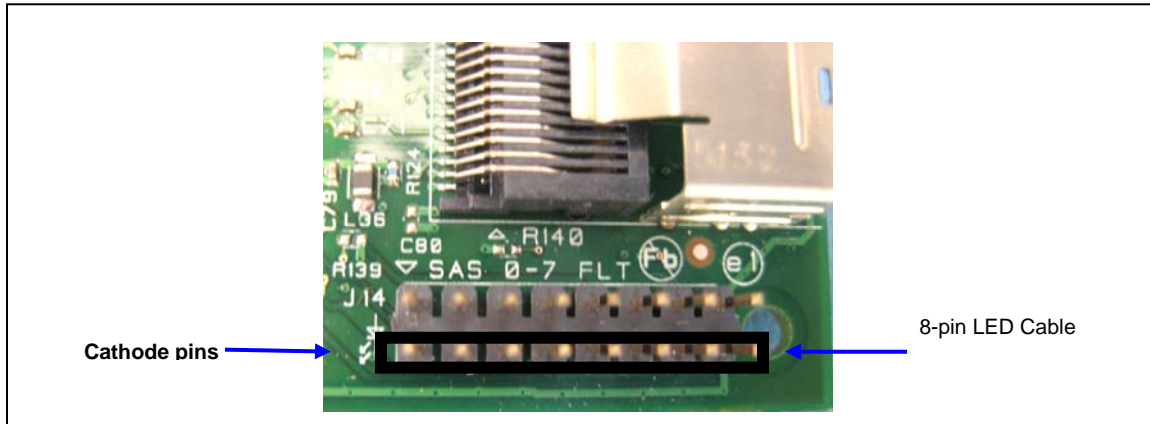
Connection of the 8-pin LED Cable Connector to LSI Card
